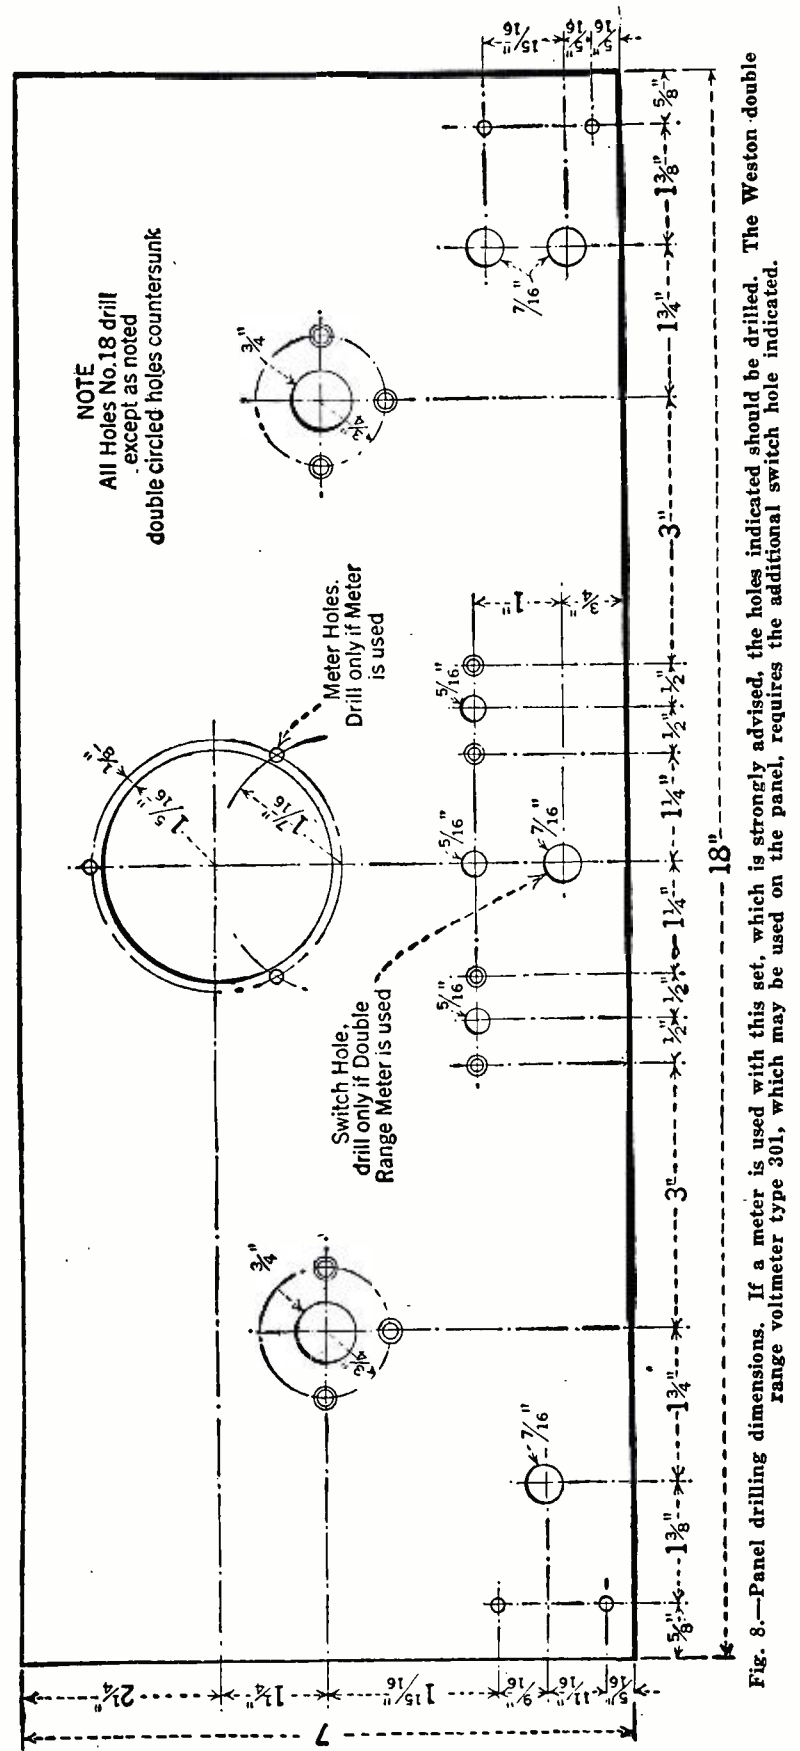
Panel drilling dimensions. If a meter is used with this set, which is strongly advised, the holes indicated should be drilled. The Weston double range voltmeter type 301, which may be used on the panel, requires the additional switch hole indicated.
